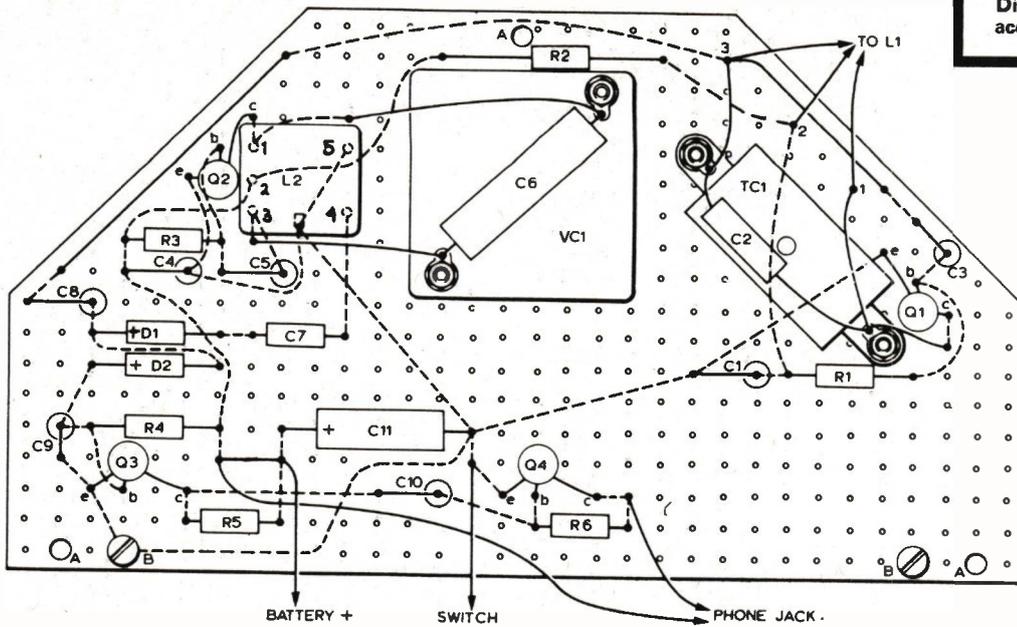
Component layout — shown here mounted on matrix board (124.5 mm x 71 mm). Dotted lines show wiring on reverse side.
